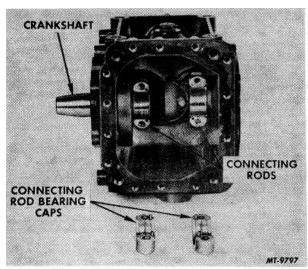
Connecting Rod Bearing Caps Removed Remove pistons from cylinders, Fig. 20. Note during piston removal that the piston wrist pin roll pin is towards the center of the compressor. If positioned toward the outside during reassembly, the roll pin may contact the crankshaft when the piston is at the bottom of its stroke.
